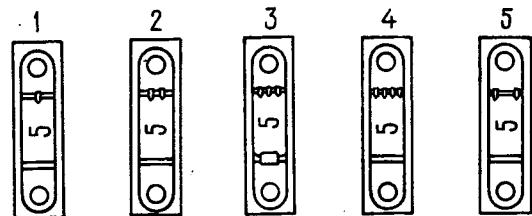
Marks on Main Bearing Caps (bearings are counted from engine front) and Cylinder Block Code Number
